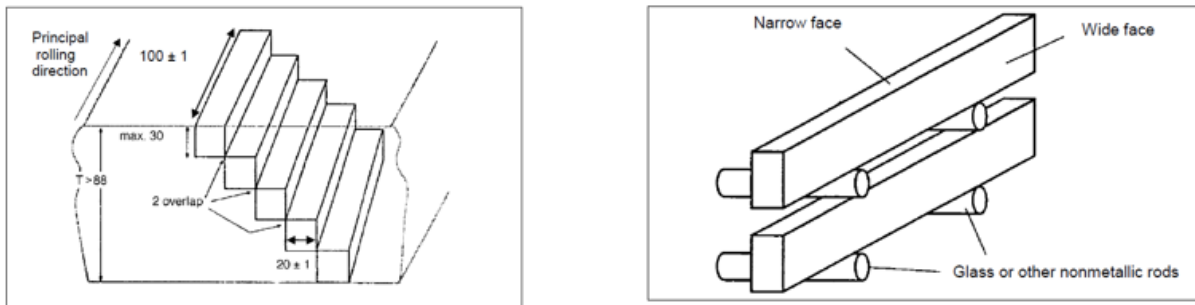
Cross-Sectional Samples and Setup within the test cylinder for NACE TM0284 Testing
